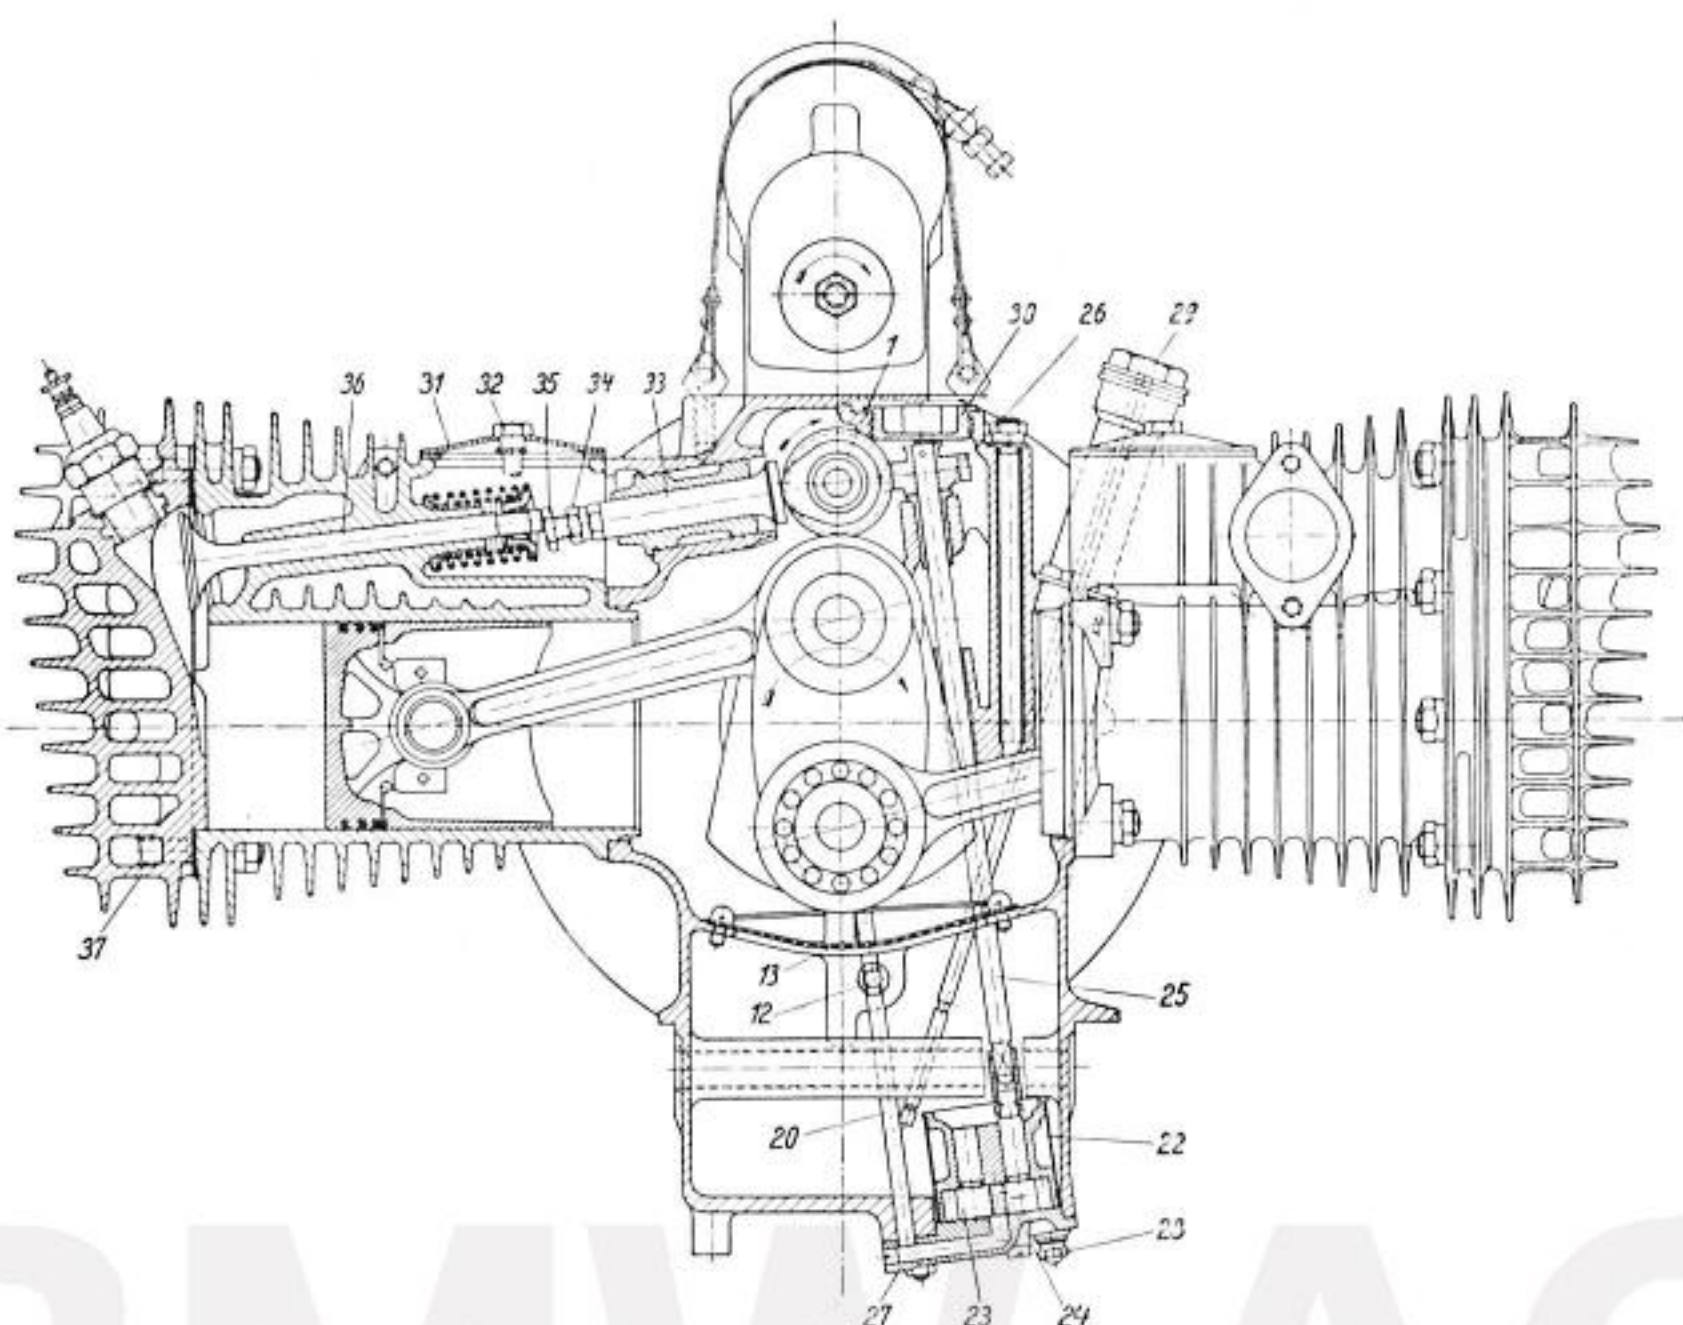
Touring engine with partial cross section through the middle of the cylinder
